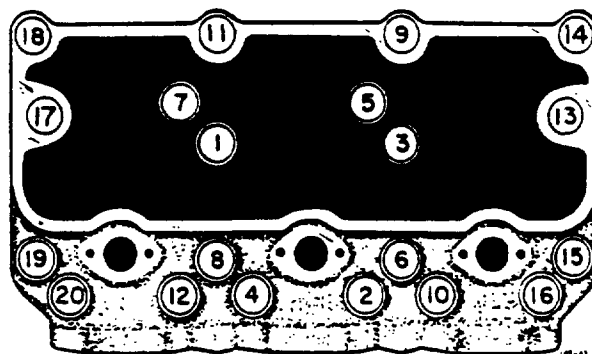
414. Cylinder Head Stud Nut Tightening Sequence
